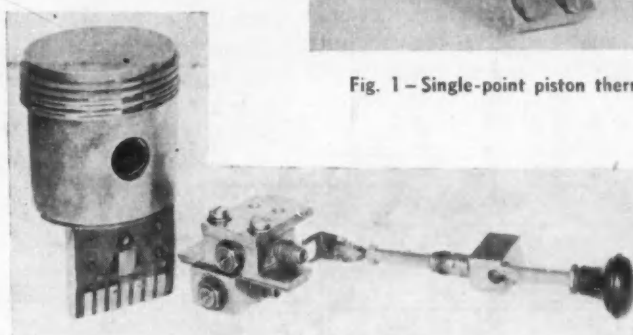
Multipoint piston thermocouple contactor mechanism
